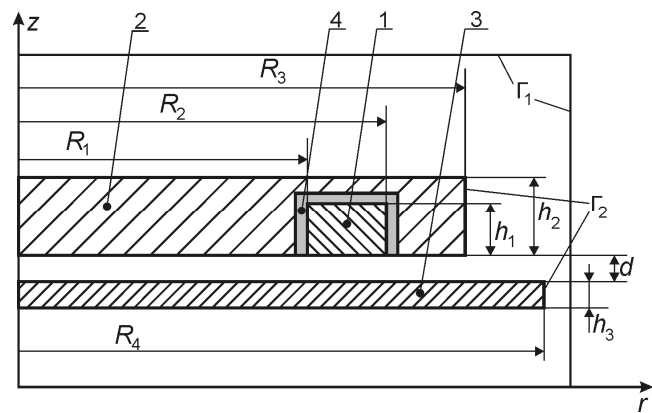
Inductor – workpiece system (axisymmetrical model). 1 – wireway of the inductor, 2 – assistant screen, 3 – workpiece, 4 – insulation.
